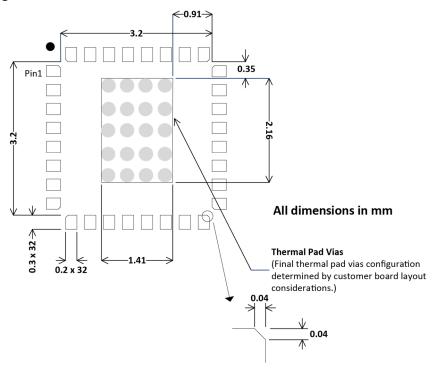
ARC3C0845 32P QFN Recommended PCB Footprint
